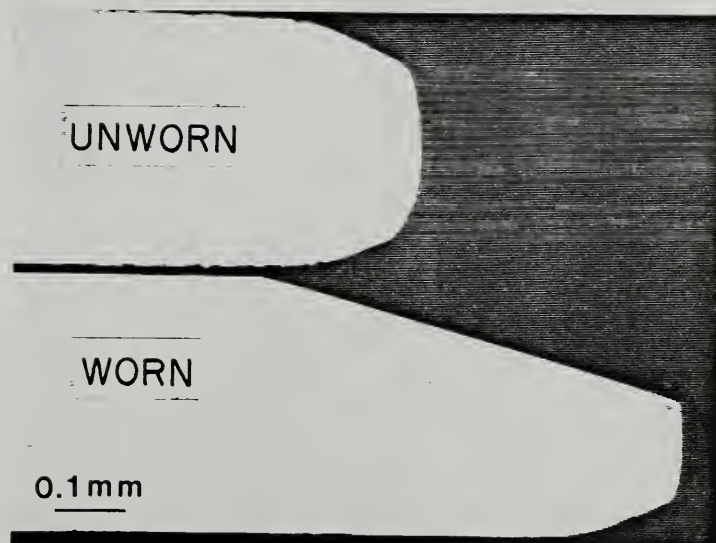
Photographs of the cross sections of worn and unworn wiper blades.
